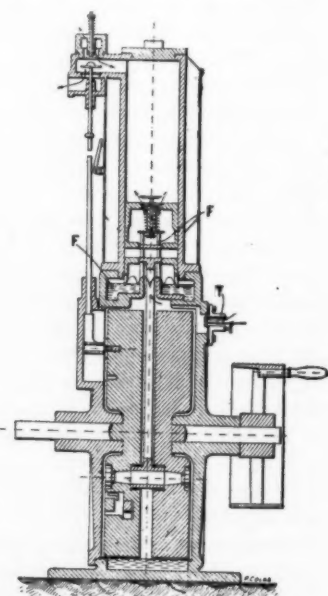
Enclosed flywheel type with valve in piston, patented in 1885.
